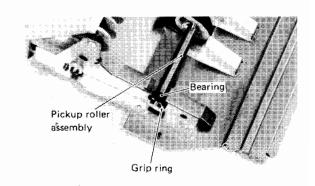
Paper Pickup Rollers (retaining bearings)
